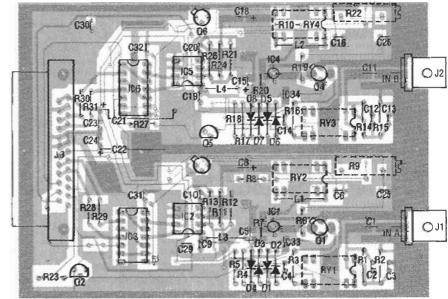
PARTS-PLACEMENT DIAGRAM for the AP10H board.
